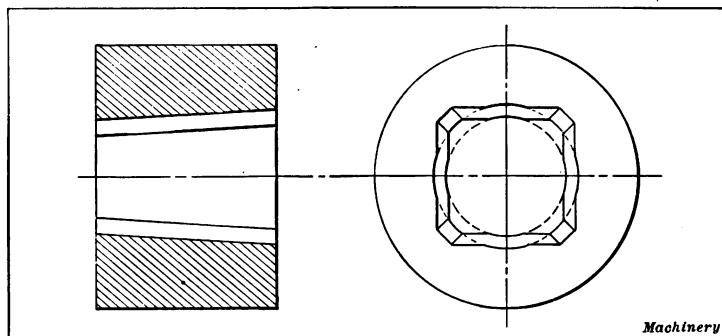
Taper Hole Broached by Means of the Device shown in Fig. 23
